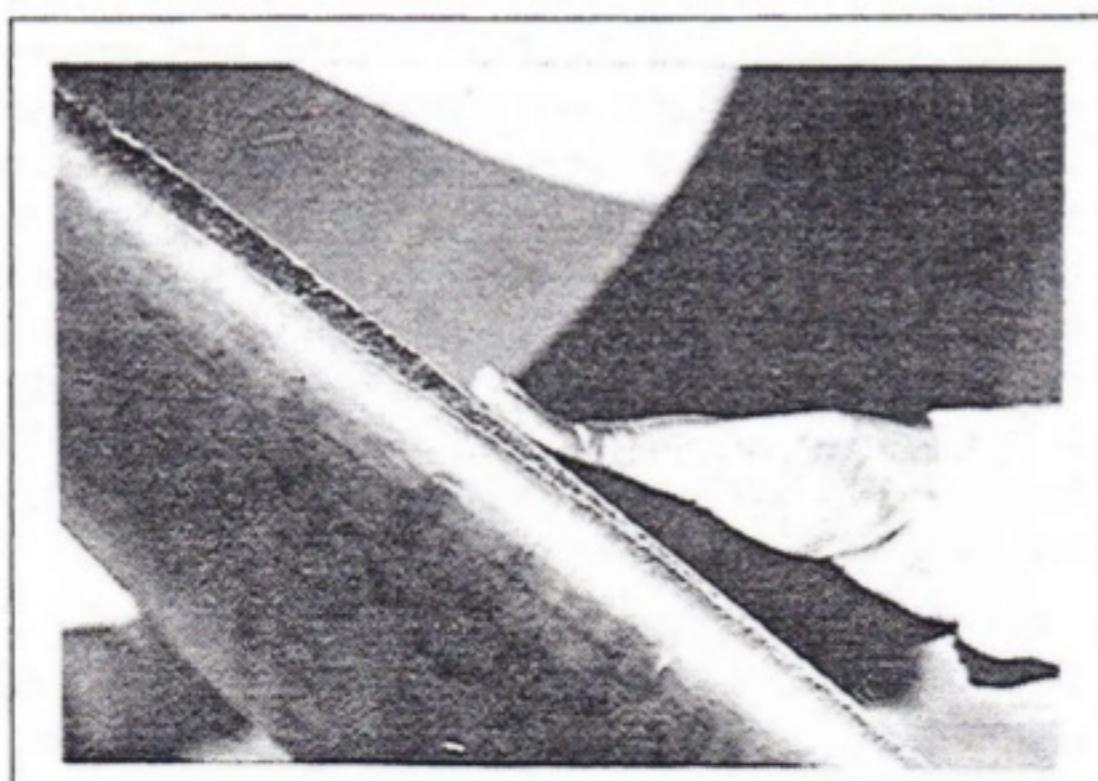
Propeller nicks and scratches must be properly removed to avoid in-flight blade failure.
